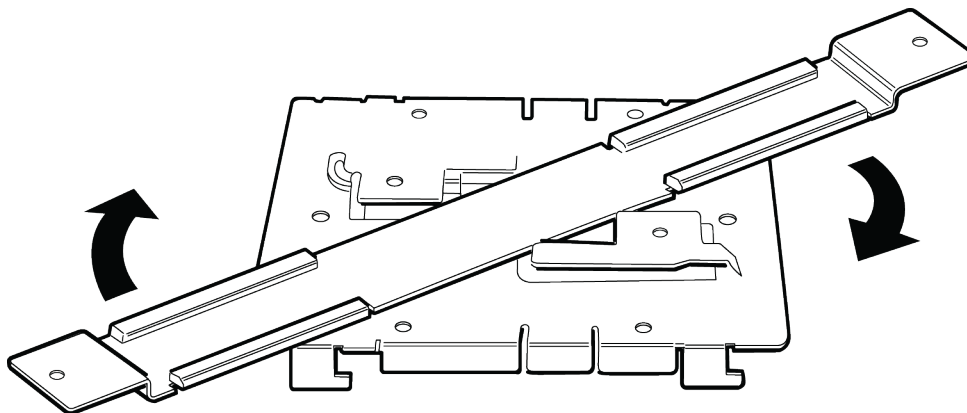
Attaching the optional Flat Metal Indoor Adaptor to the main mounting bracket
